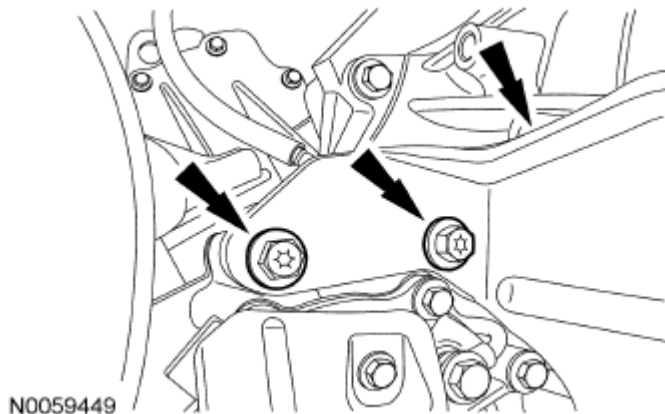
Locating PTU Bracket-To-PTU Bolts And Bracket
